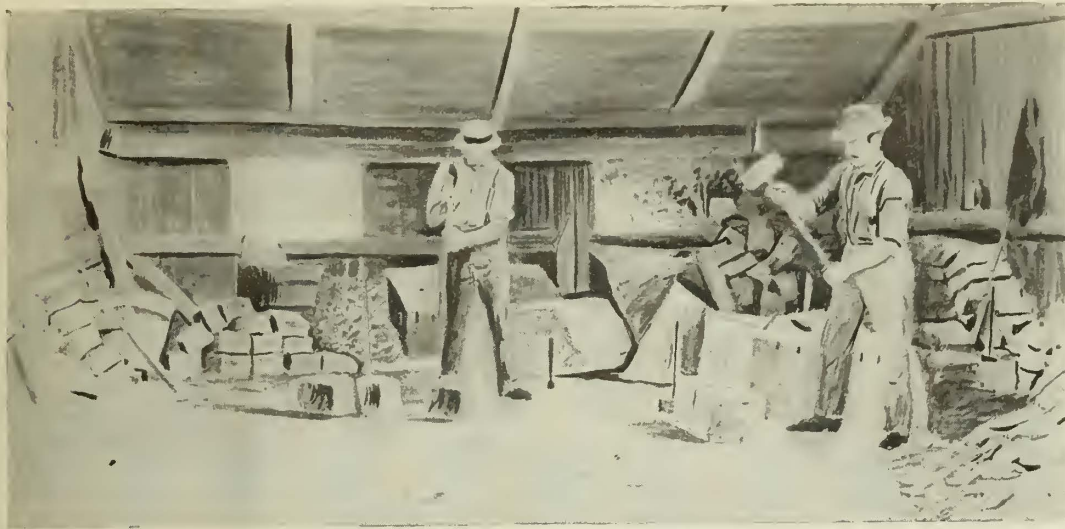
CUTTING SHED—SPLITTING AND TRIMMING TO STANDARD DIMENSIONS.
